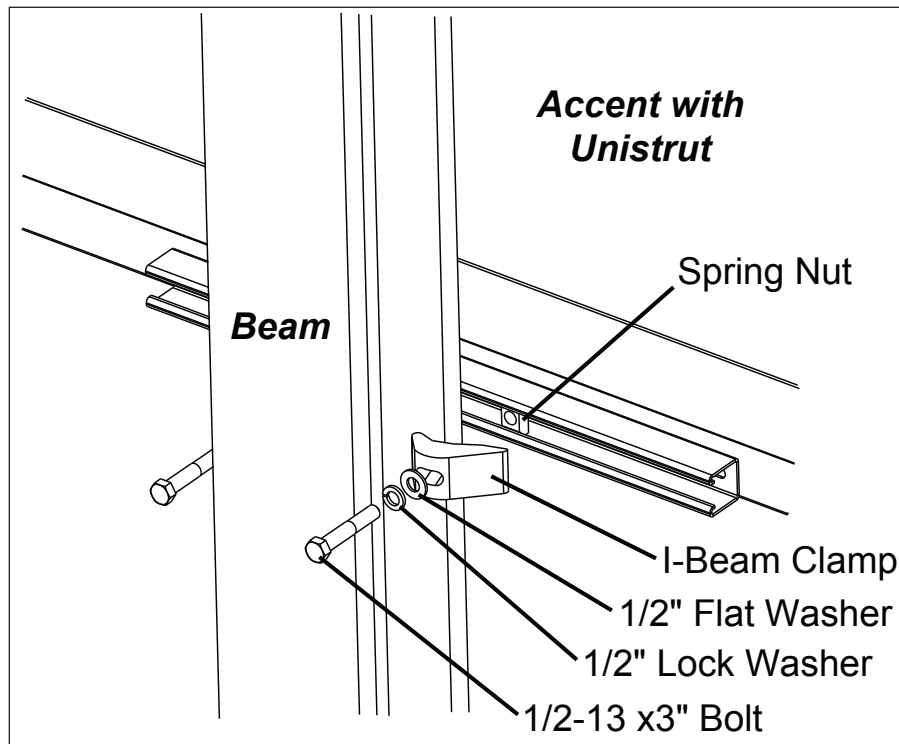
Accent Mounting with I-beam Clamps, Rear Isometric View
